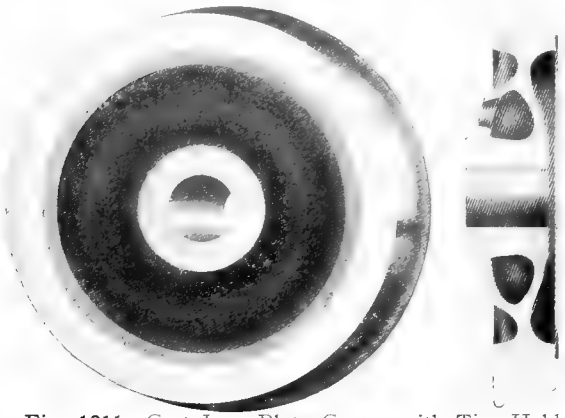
Cast Iron Plate Center with Tire Held by Shrinkage and Shoulder.
